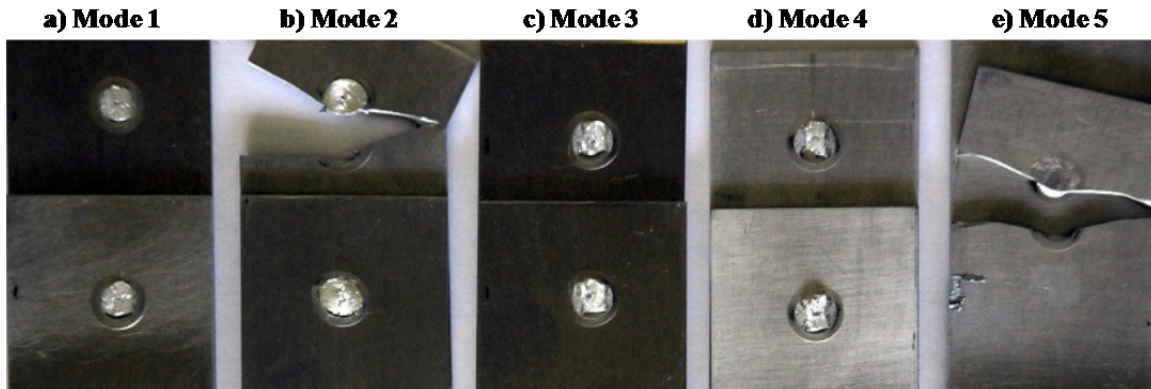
Fractured fatigue resistance spot welding specimens.
